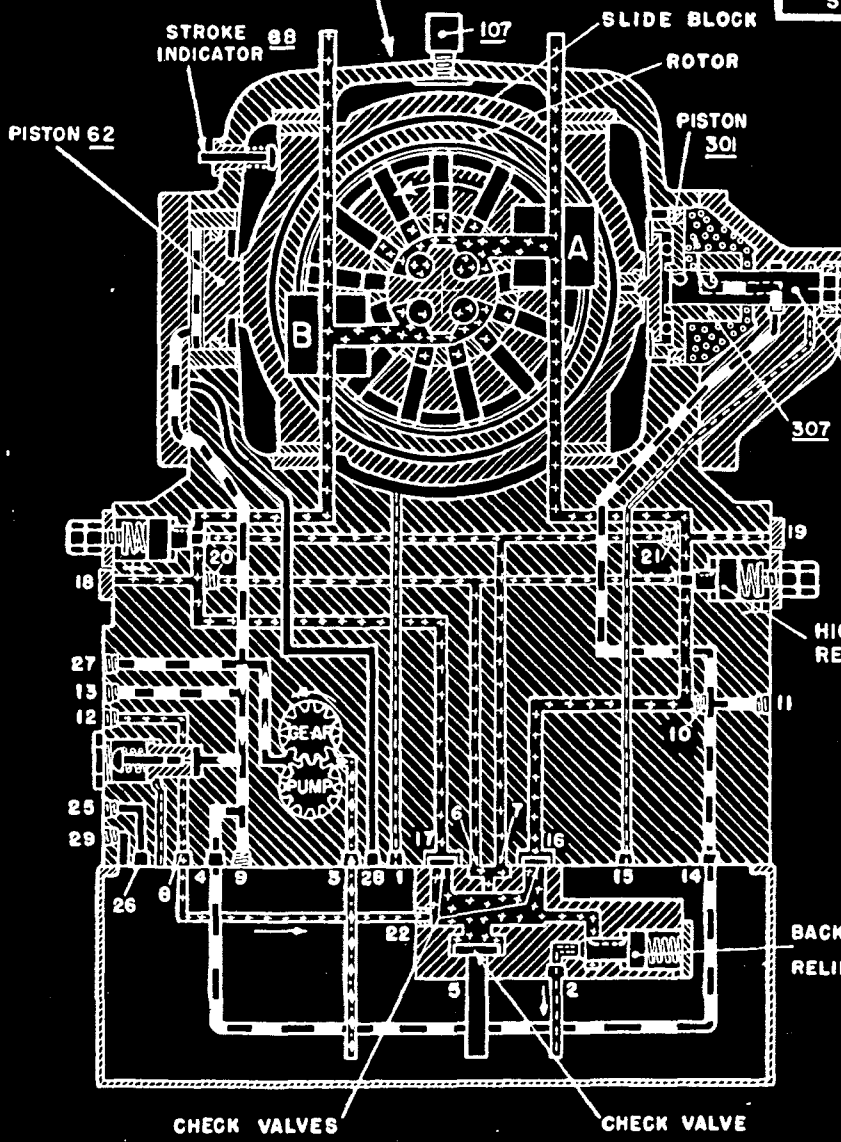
Plan View, Cross Section of Type "DH" Pump at Full Delivery Stroke
